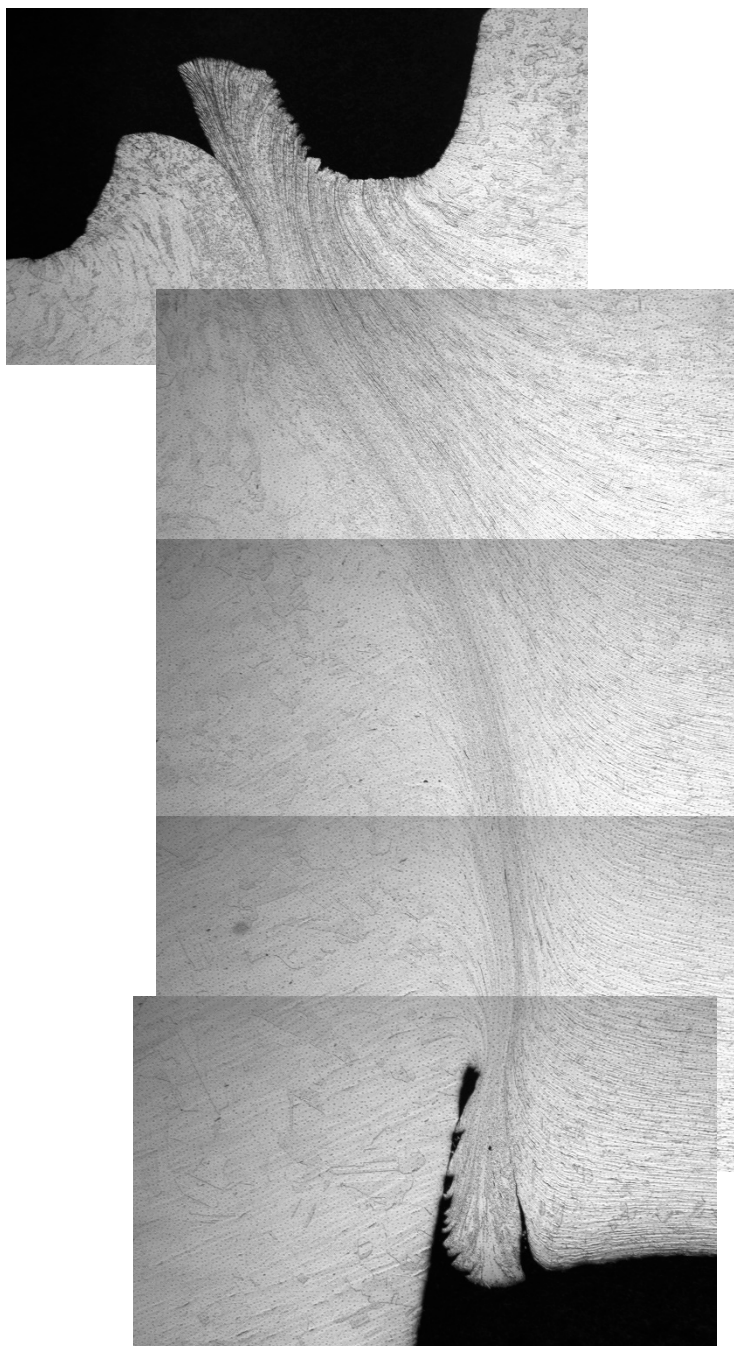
Typical weld microstructures showing the plug to nozzle resistance closure weld extending from the bottom of the plug to the top of the plug of Test Nozzle Weld No. TN00275/WP04448.
